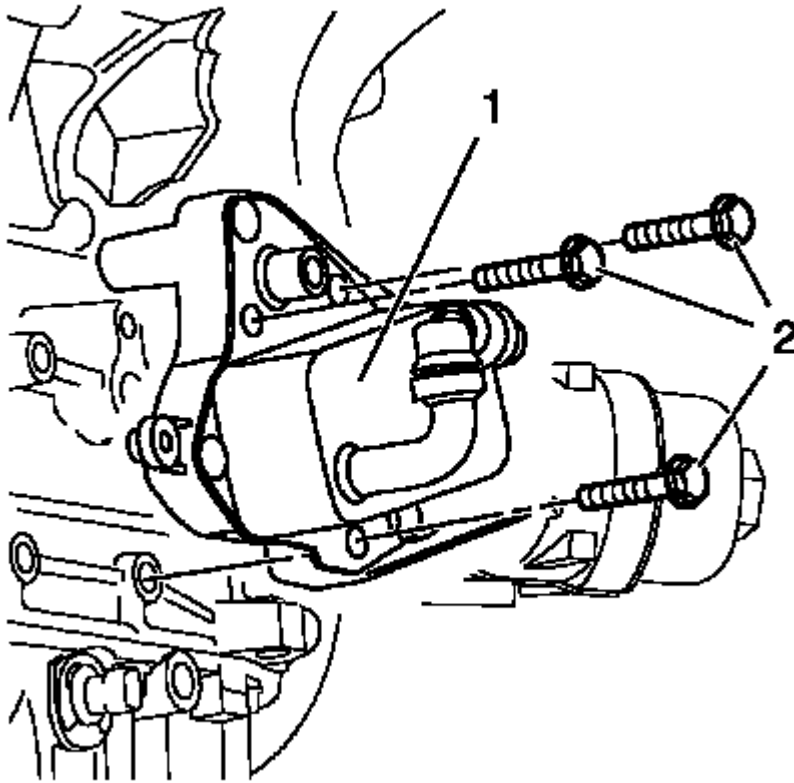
Oil Filter Adapter And Oil Cooler Assembly Bolts
